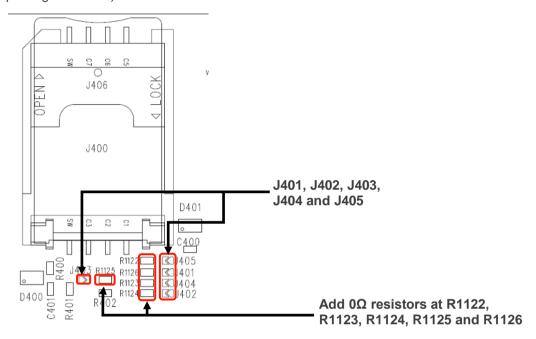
Solder Pads and Resistor Locations on the SIM Interface
